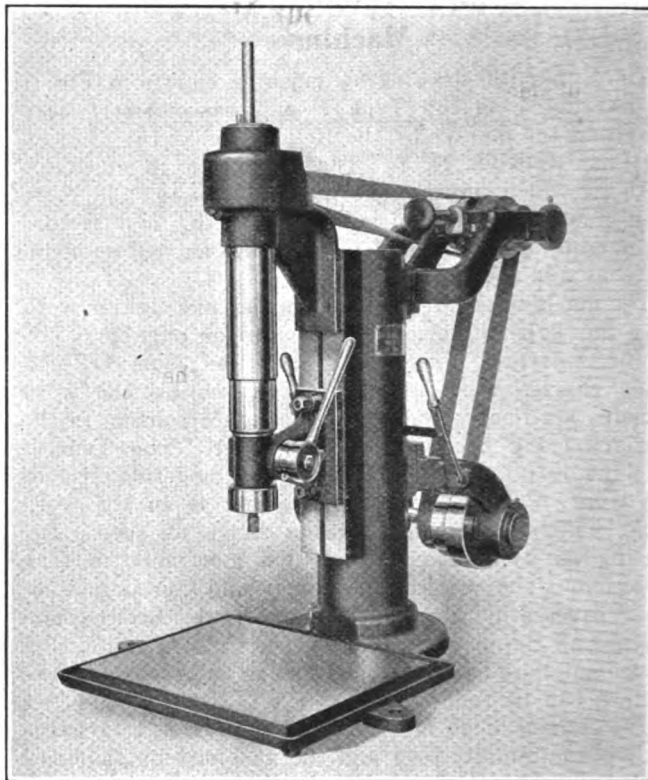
NO. 1 HIGH SPEED BENCH DRILLING MACHINE
